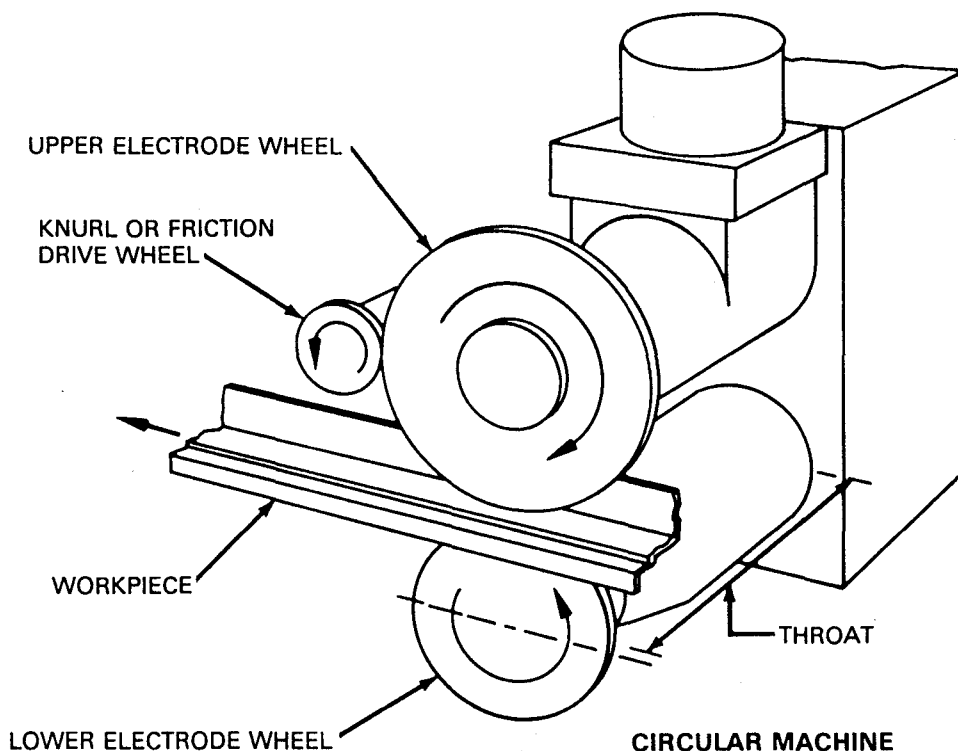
Position of Electrode Wheels on Resistance Seam Welder
